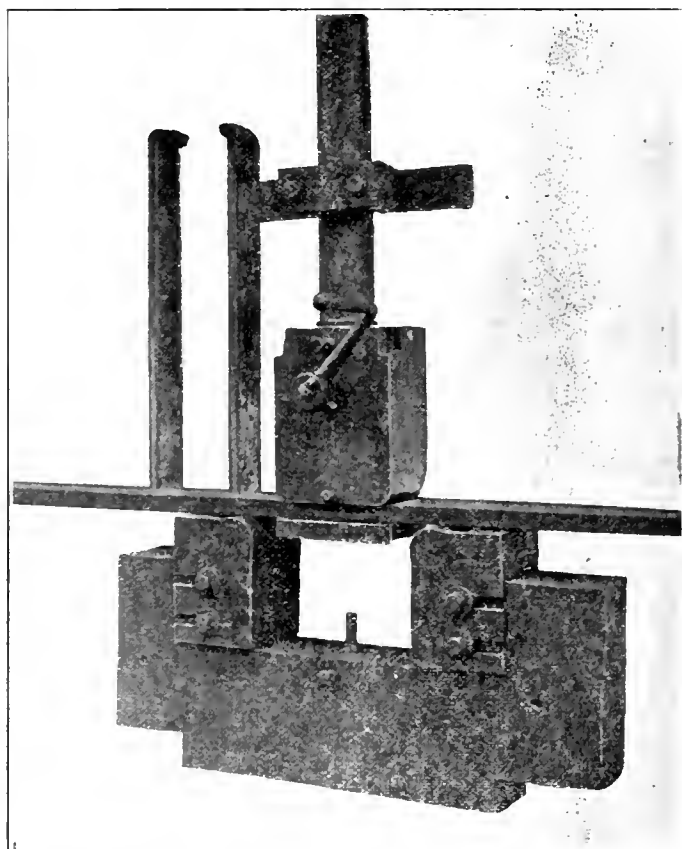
COMBINATION TOOL FOR BENDING AND PUNCHING DRAWBAR POCKETS.
